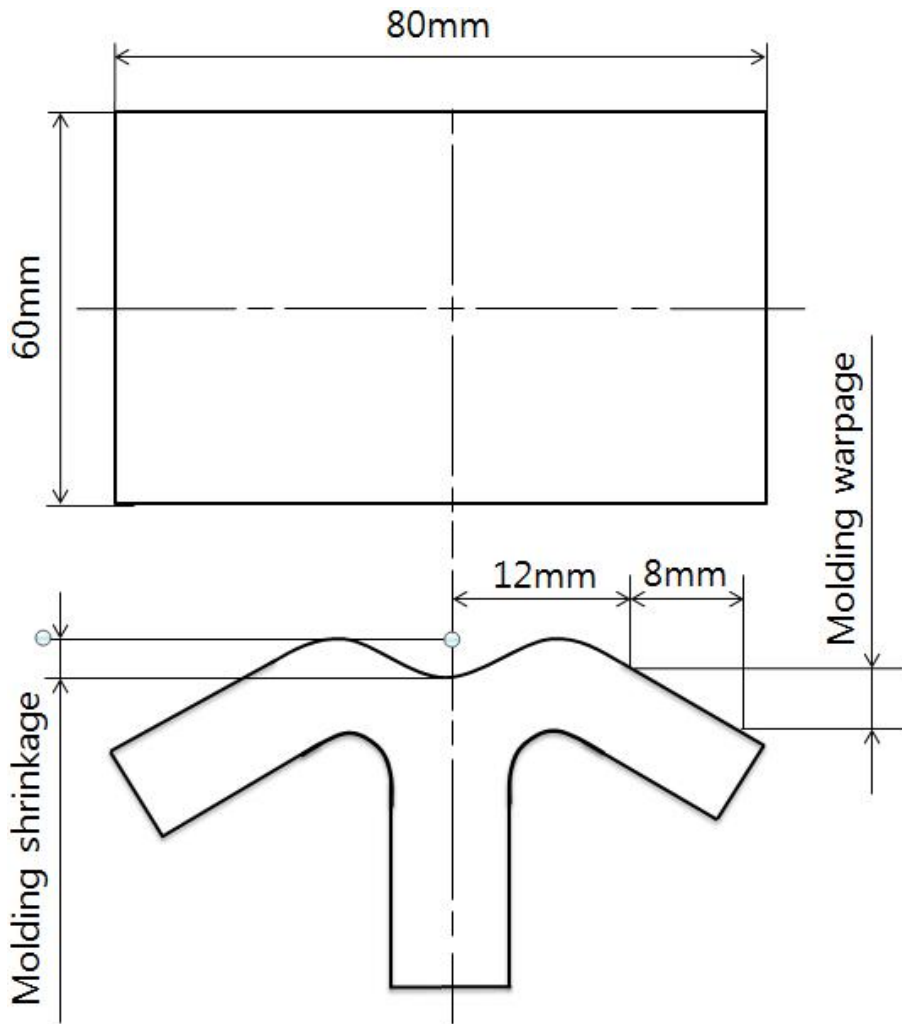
Molding shrinkage and warpage of the rib molded product
